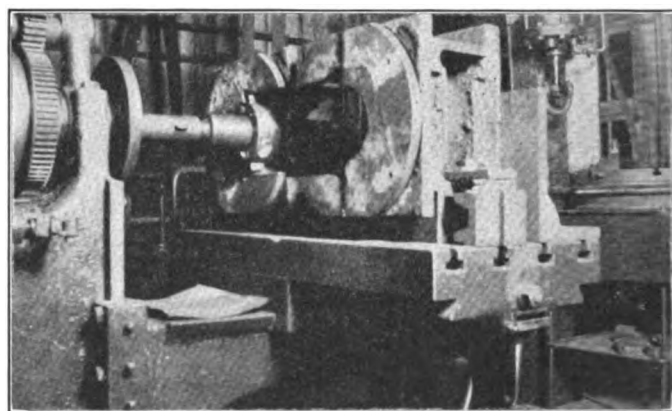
Method of boring driving boxes in a horizontal boring machine
